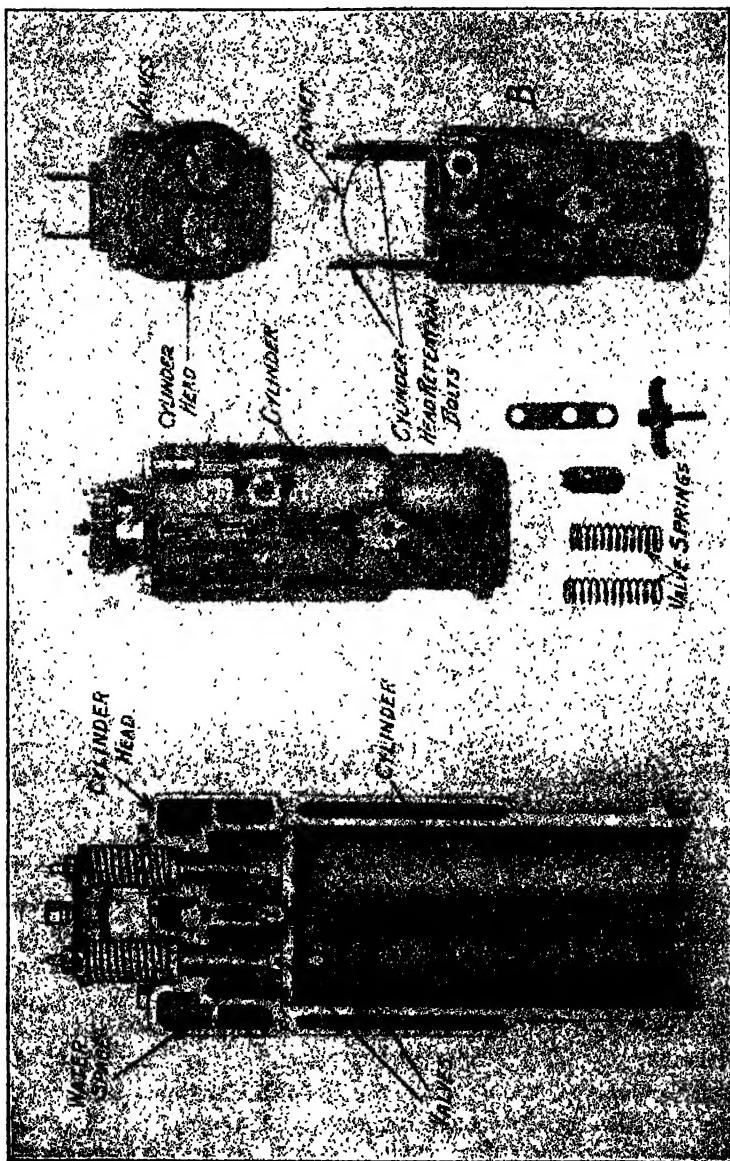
Views Outlining Construction of Knox Detachable Head Motor Cylinder.
